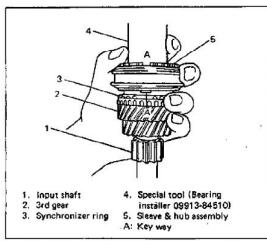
A-44 Press-fitting High Speed Sleeve & Hub
